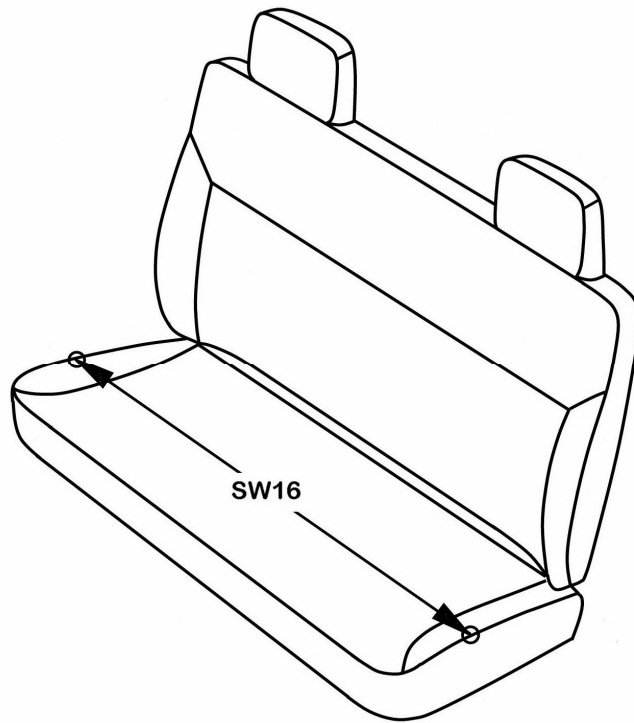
A—BENCH SEAT WIDTH DIMENSION
